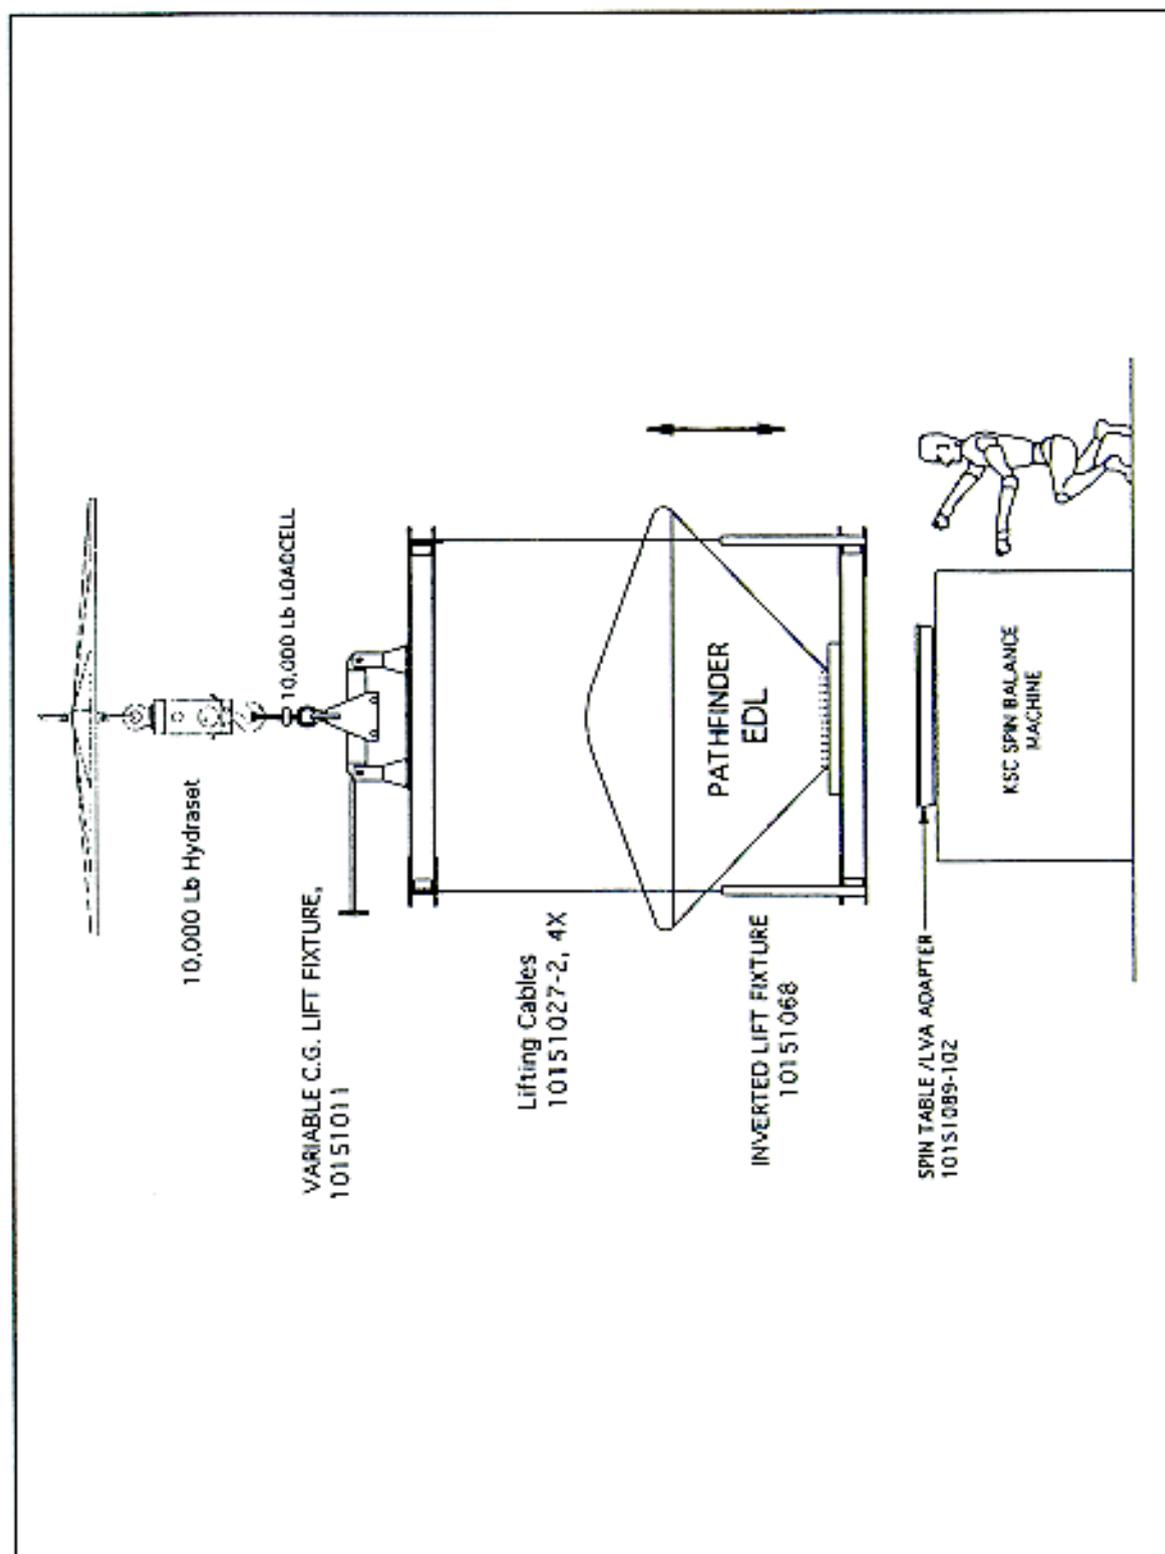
Mounting/Removing the MPF S/C On & Off the KSC Spin Balance Machine
